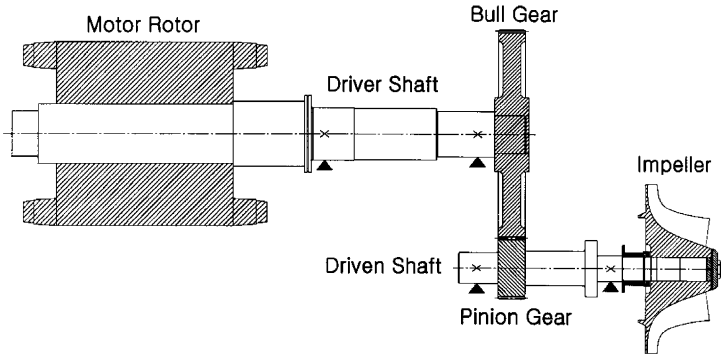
Schematic of a 800 RT turbo-chiller rotor-bearing system.
